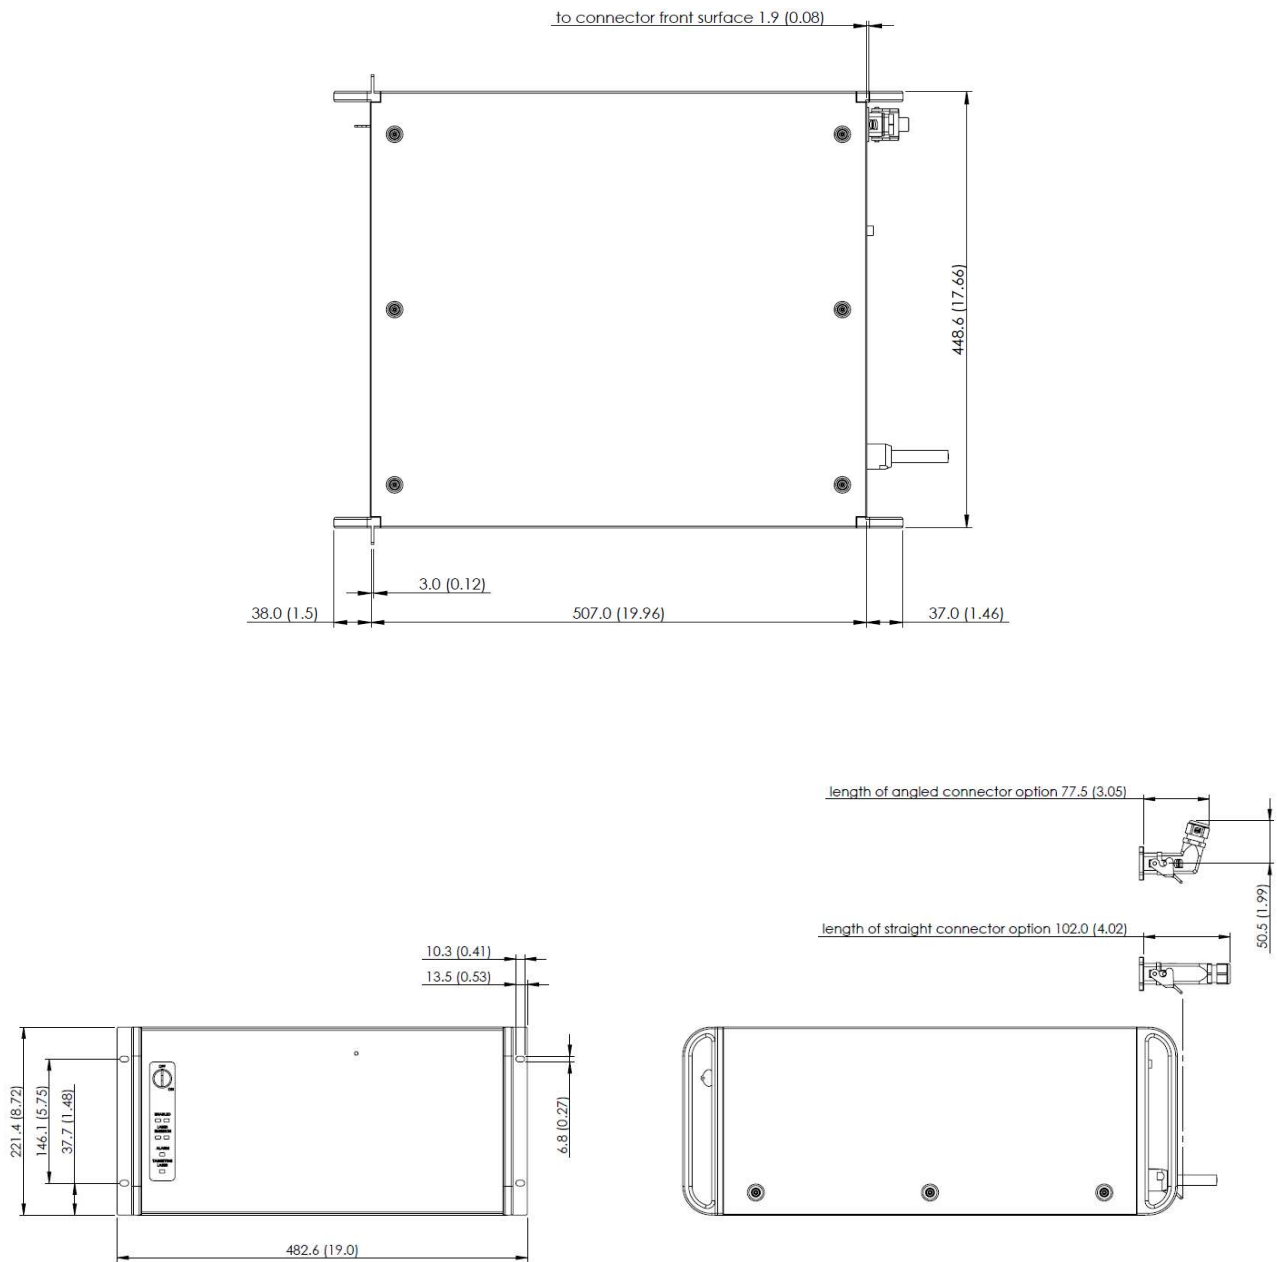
Outline Drawing – Laser System – Water Cooled Variants
